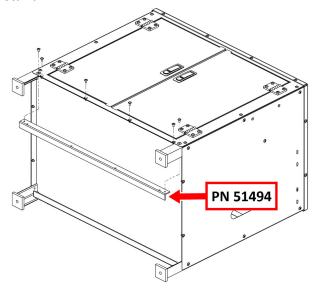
Attaching the bottom stiffener to the front of the machine stand.
